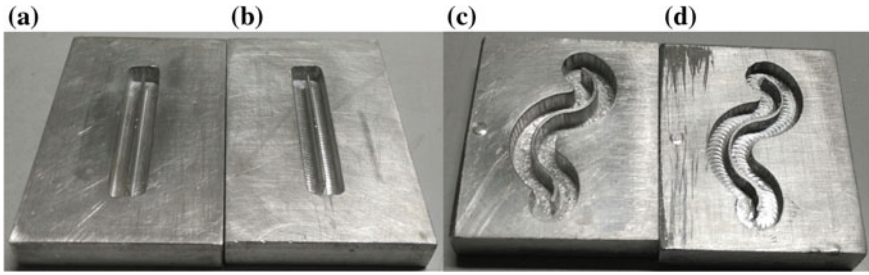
Machined thin-walled structures: a straight structure machined with UAM, b straight structure machined with CM, c curved structure machined with UAM and d curved structure machined with CM
